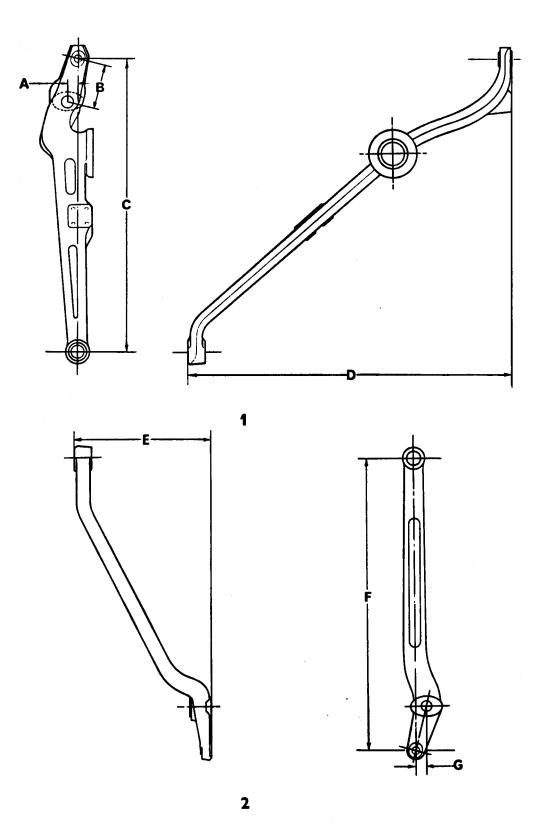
CHECKING DIMENSIONS-FRONT AND REAR LOWER TRIANGLE LEVERS
